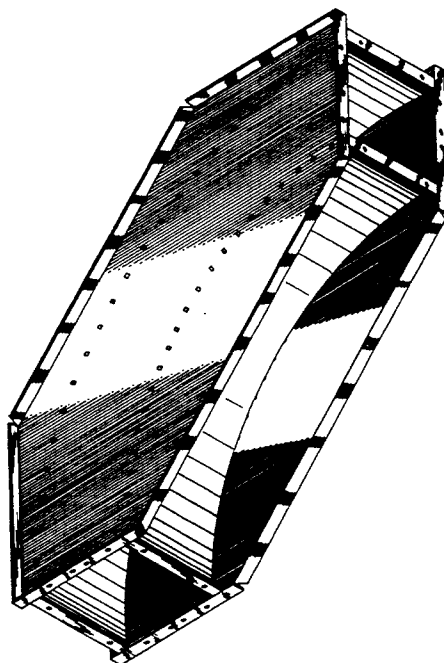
is a perspective view of a 90° embodiment, depicting the top, front and right side of the corner assembly design of this invention;
